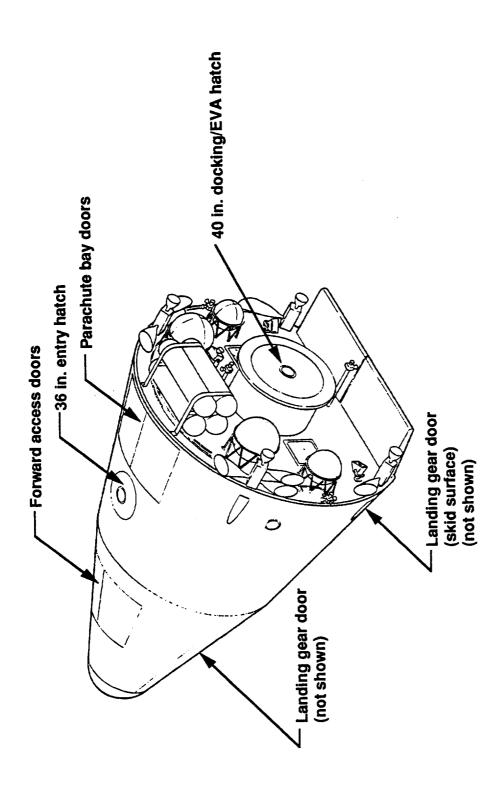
PLS Doors/Hatches/Access Panels
